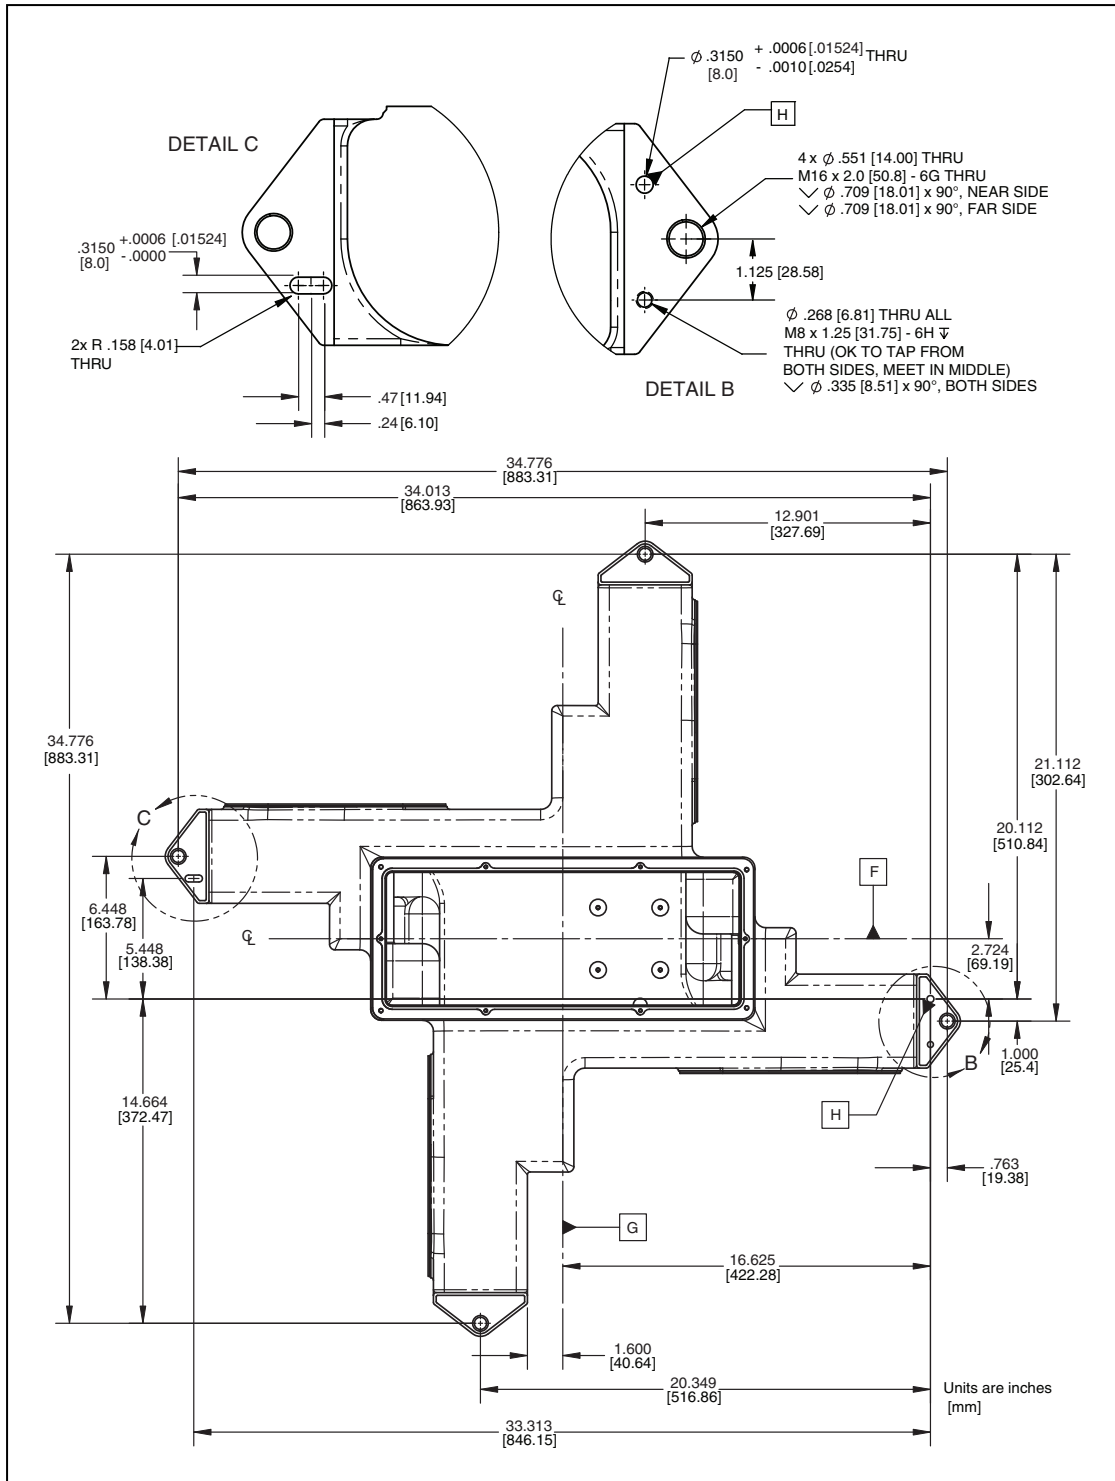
Mounting Hole Dimensions, iX4-650H/800H Robots
